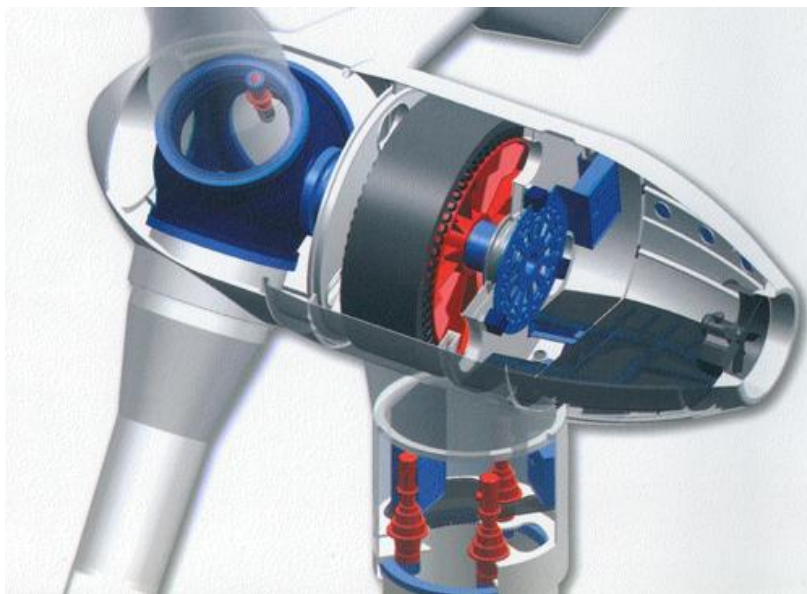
A direct drive gearbox design. Source: MTorres
